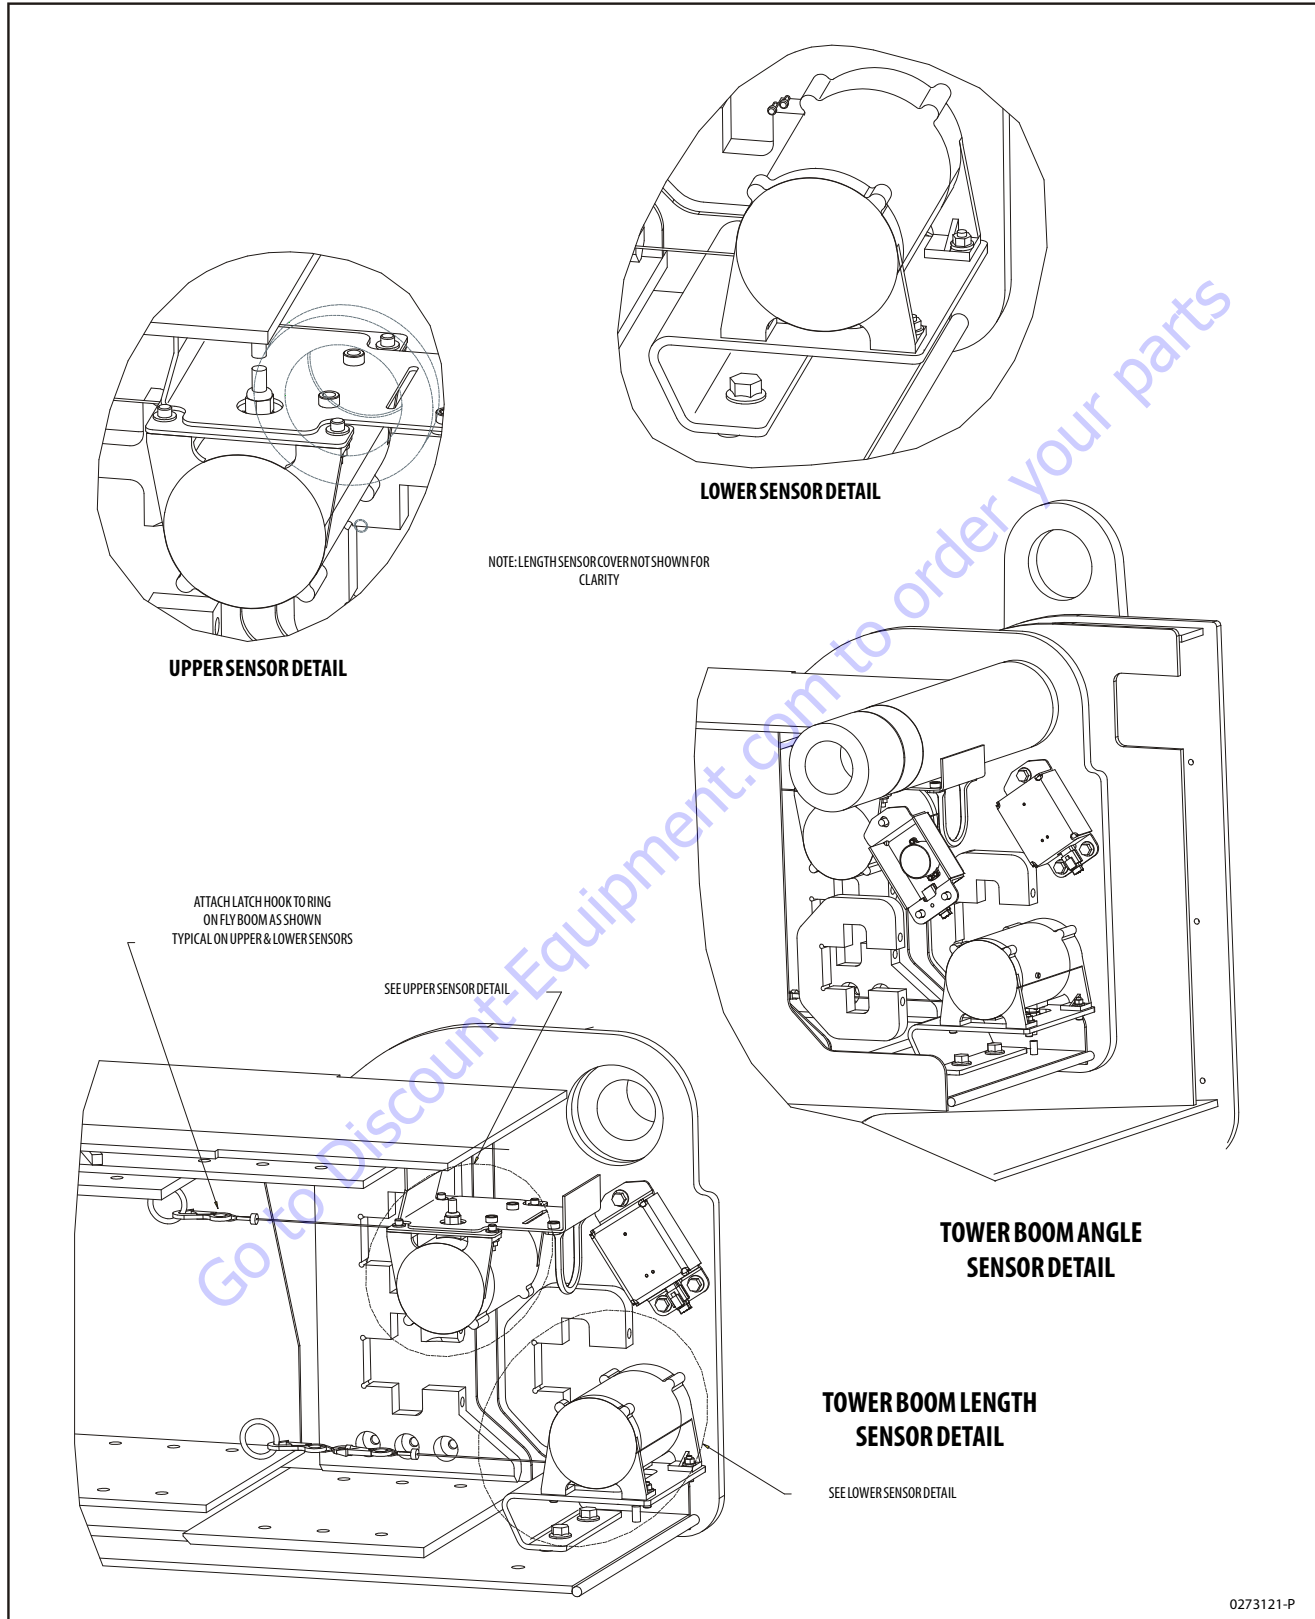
Boom Sensor Locations - Upper Length, Lower Length, & Tower Boom Angle - Sheet 1 of 2
